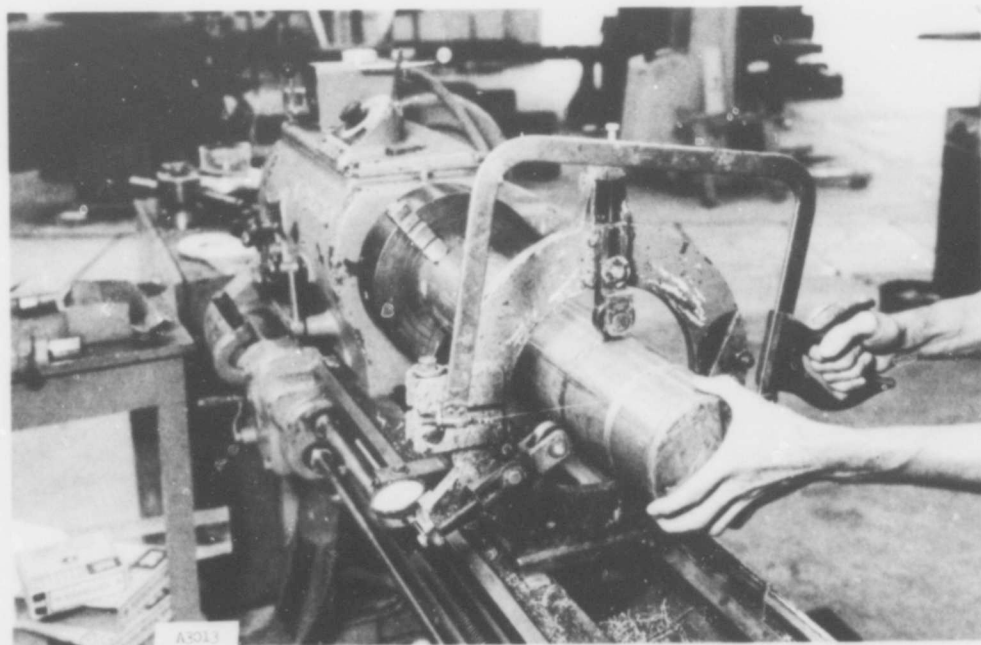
Wire saw being used to separate soil sample after rough machine cuts through steel Shelby tube.
